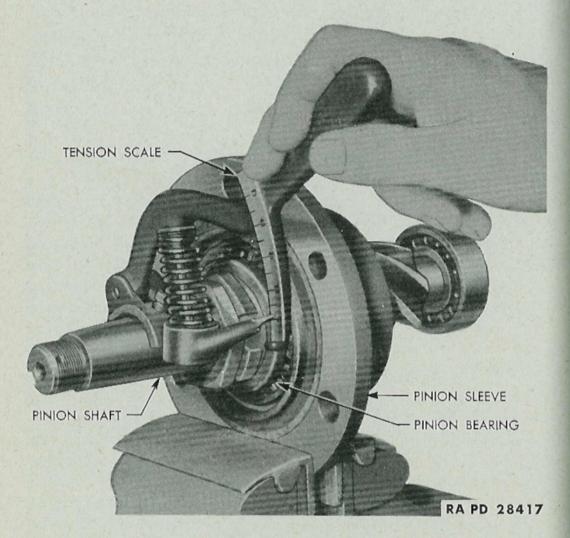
Checking Preload on Pinion Gear Shaft Bearings with Tension Scale 41-S-495
